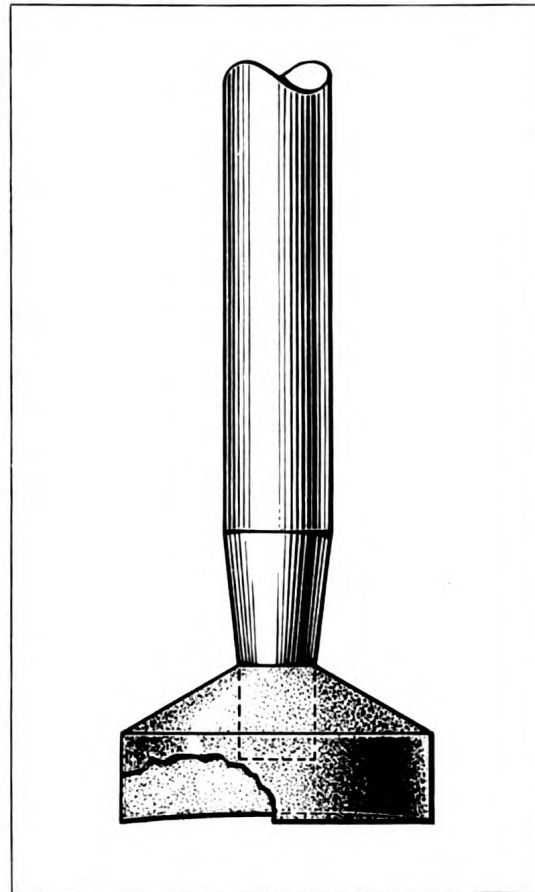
Concave bottom surface of wheel minimizes burning during bottoming.
